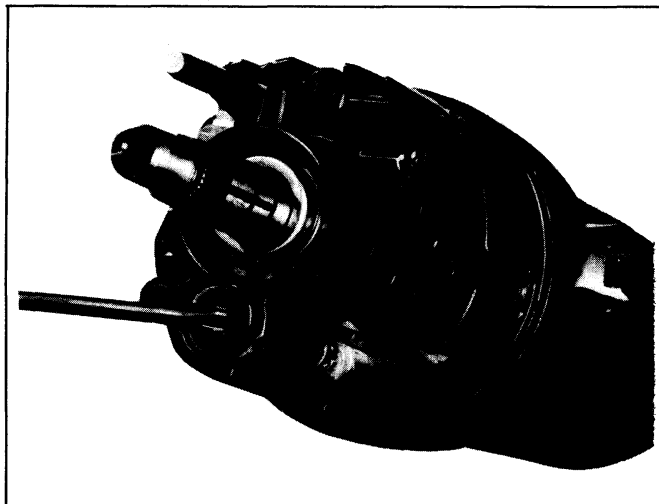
B-90--Removing Tilt Lever Spring Retainer
